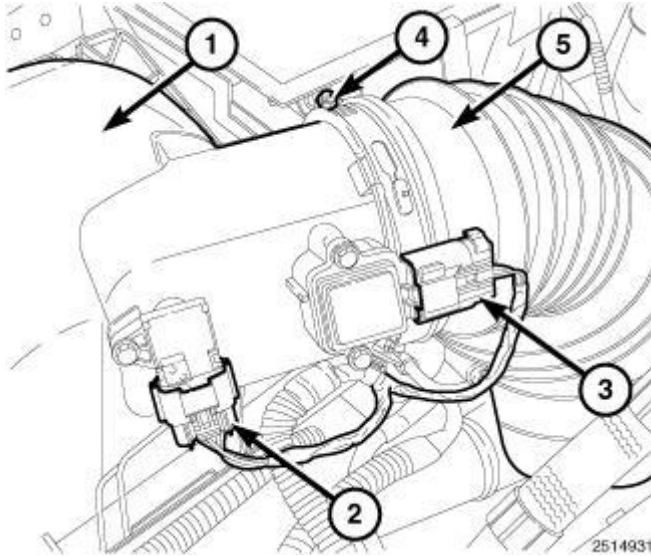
Identifying MAF Sensor, TBAP Sensor, Intake Air Tube, Air Cleaner Body & Clamp
